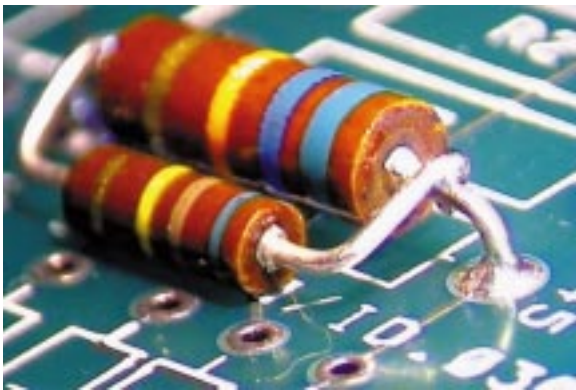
Axial lead component soldered to adjacent axial lead component. Note: Added component may be stacked vertically or horizontally.
